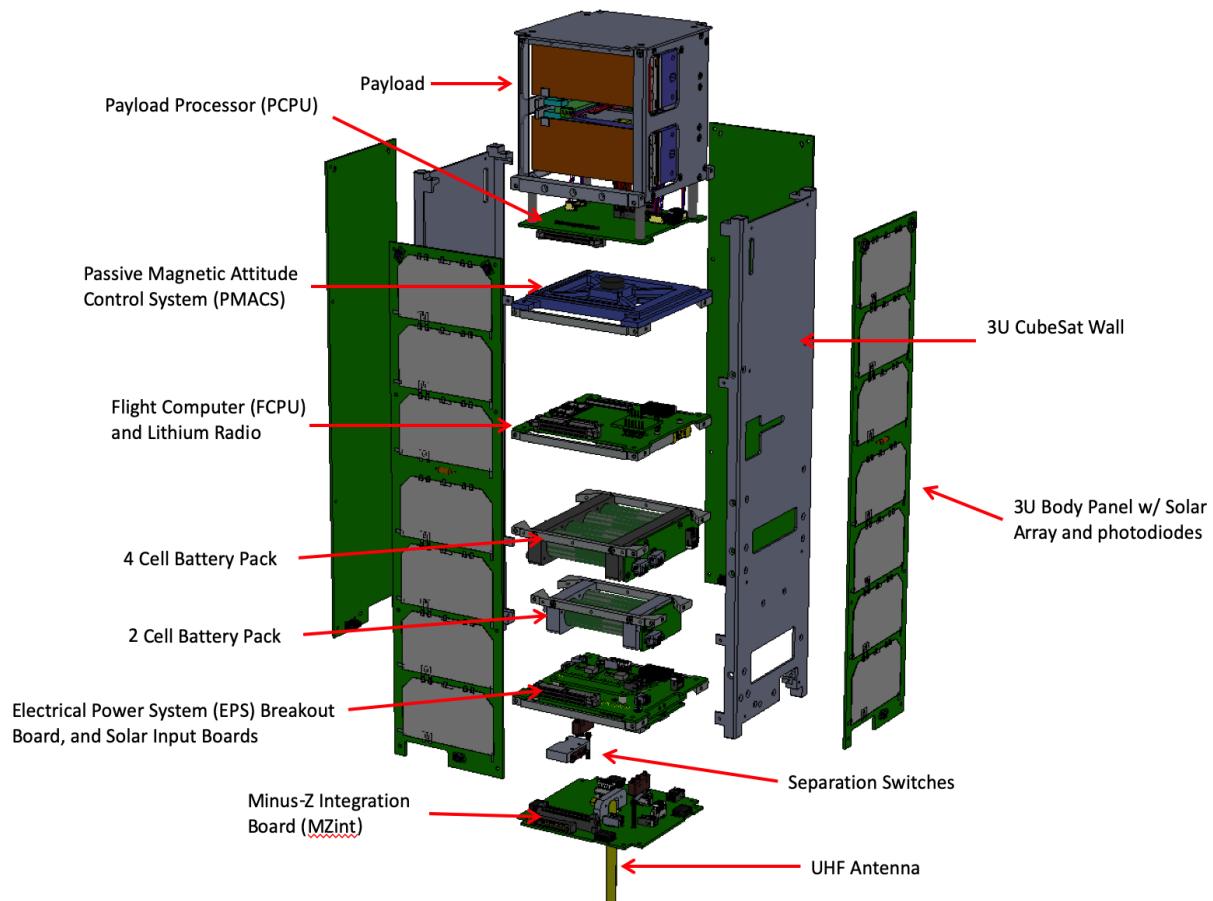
Engineering drawing of MARIO, exploded view with subsystems labeled.
